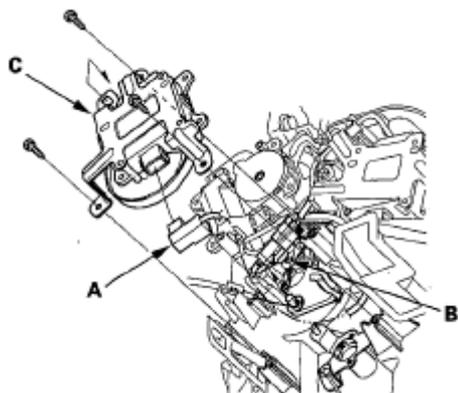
Identifying Driver's Air Mix Control Motor, Connector And Screws
